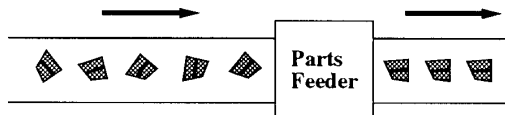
A parts feeder orients parts as they arrive on the left-hand conveyor belt.
